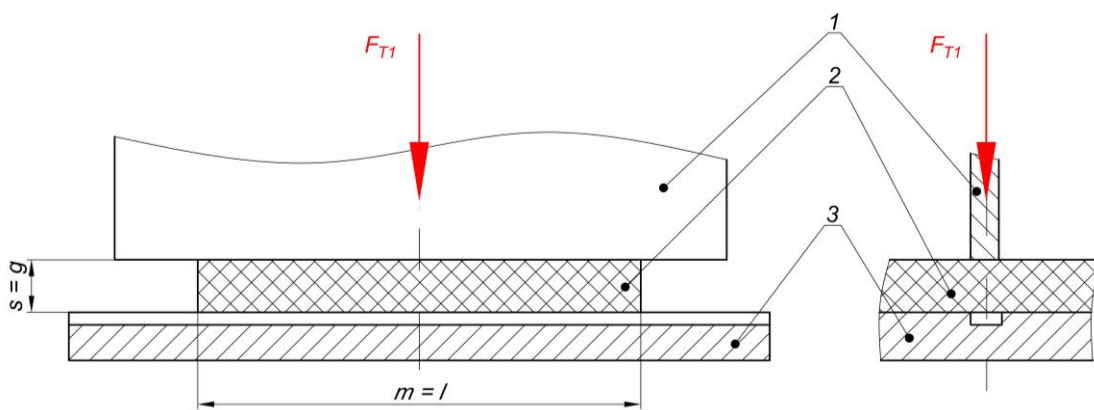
Cutting with straight knife blade: F_{T1} – total cutting force, s – stroke of cutting tool, g – thickness of cut material, l – cut line length, m – width of cut belt; 1 – knife, 2 – cut belt, 3 – support plate
